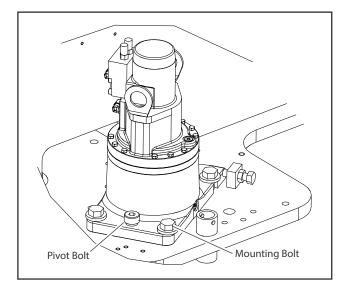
Swing Drive Pivot and Mounting Bolts
